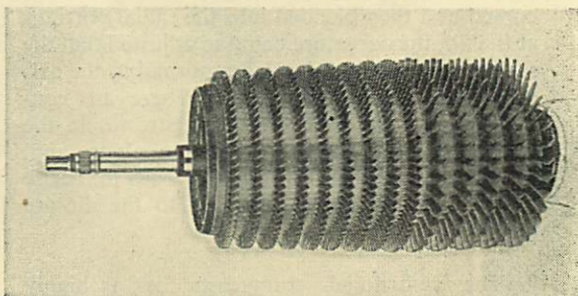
Axial Compressor Rotor showing Aerofoil Section of Vanes.
